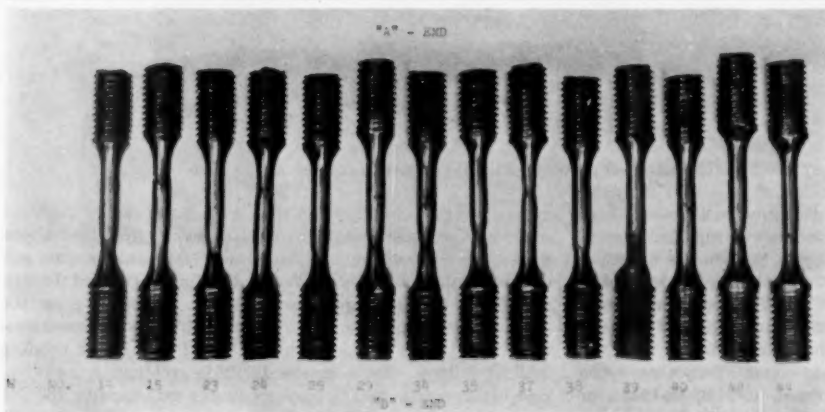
APPEARANCE OF ELEVATED TEMPERATURE (1350 F) WELD TENSILE TEST SPECIMENS AFTER RUPTURE
